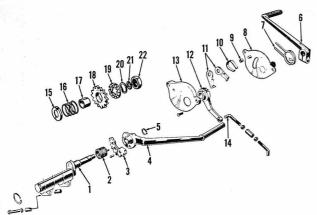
Exploded view of the kick starter and foot operated gear shift linkage.
